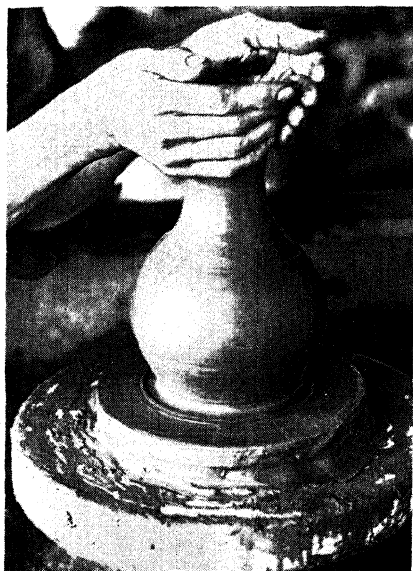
In the eleventh step, a narrow-necked vase is being made. Here the opening wanted is smaller than the hand. This piece rests upon a board fastened to the plaster wheel head with clay, and can be removed without disturbing the shape.
